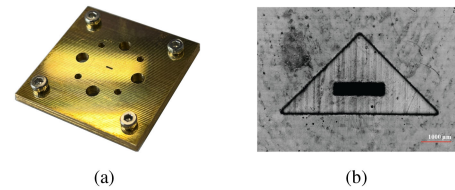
Fabricated W-band prototype. (a) Assembled filter unit. (b) Close-up view of the internal cavity and one of the resonating iris slots.
